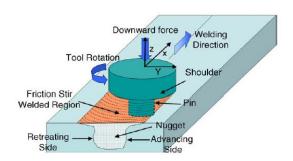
Schematic Diagram of Friction stir welding
